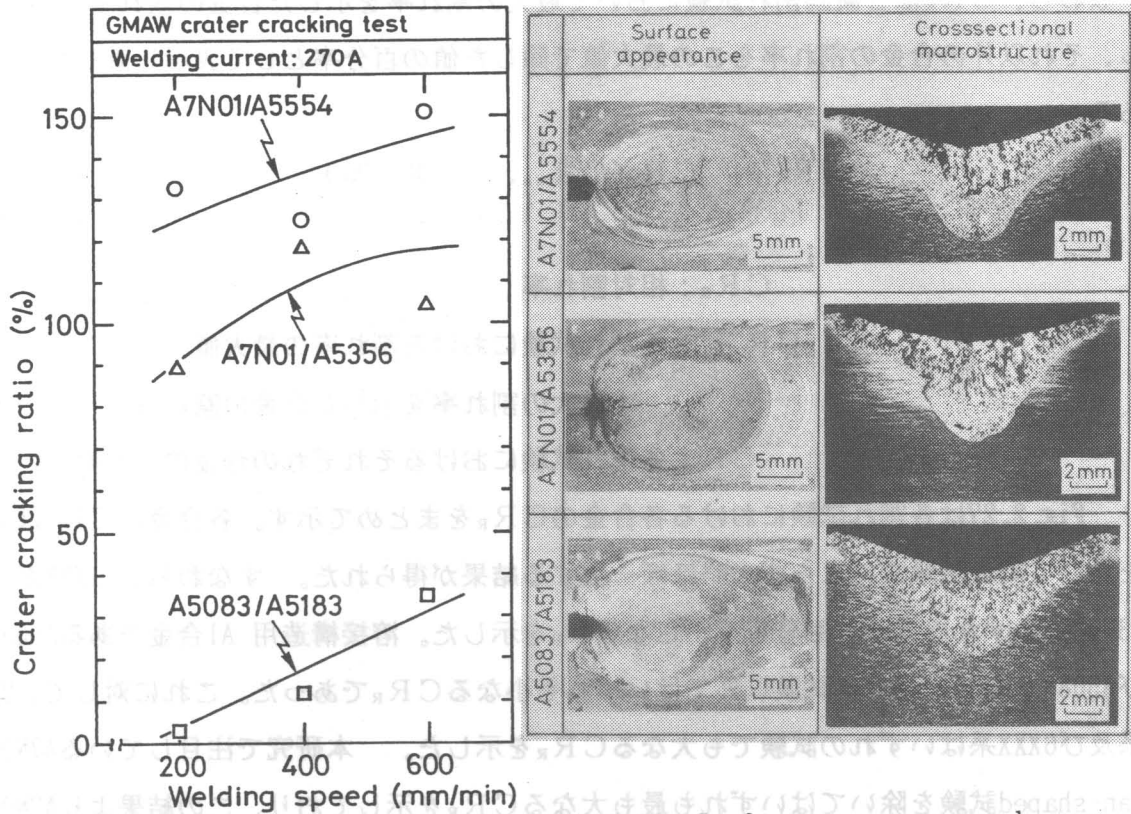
Crater cracking ratio of A7N01 and A5083 by GMAW crater test with commercial welding wires.
